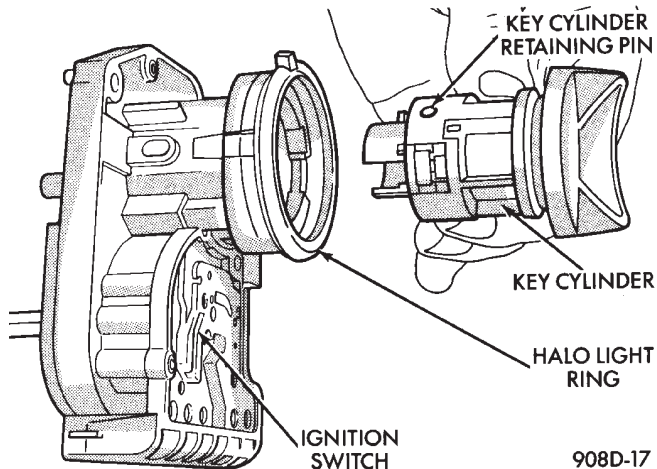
Lock Cylinder with Retaining Pin Type I
